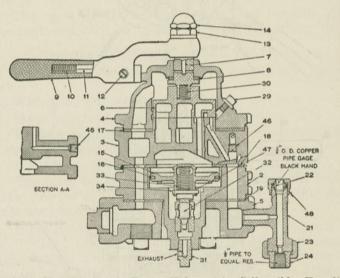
H-6 Automatic Brake Valve with Collapsible Equalizing Piston.
